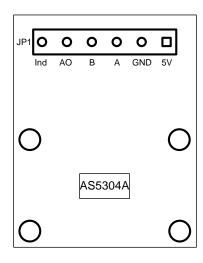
AS5304/AS5306 adapter board mounting and dimension
